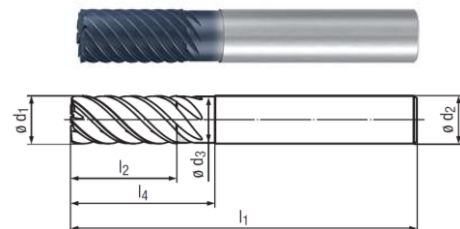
Milling tool used for finishing  $\varnothing 10$  mm [13]
